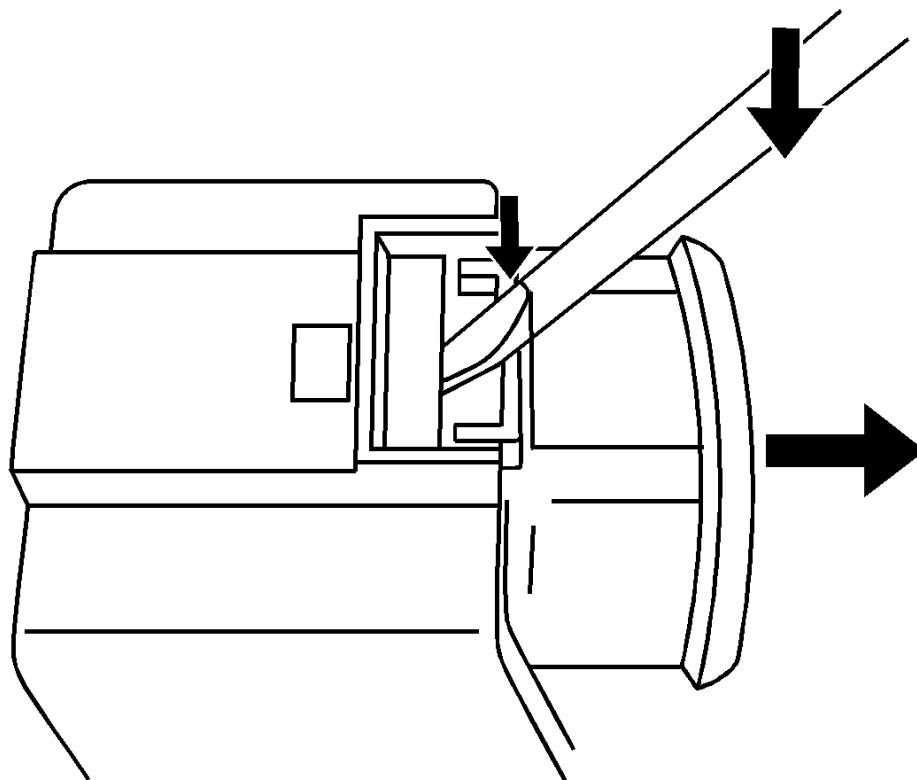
Using Flat-Bladed Tool To Depress Locking Tab
